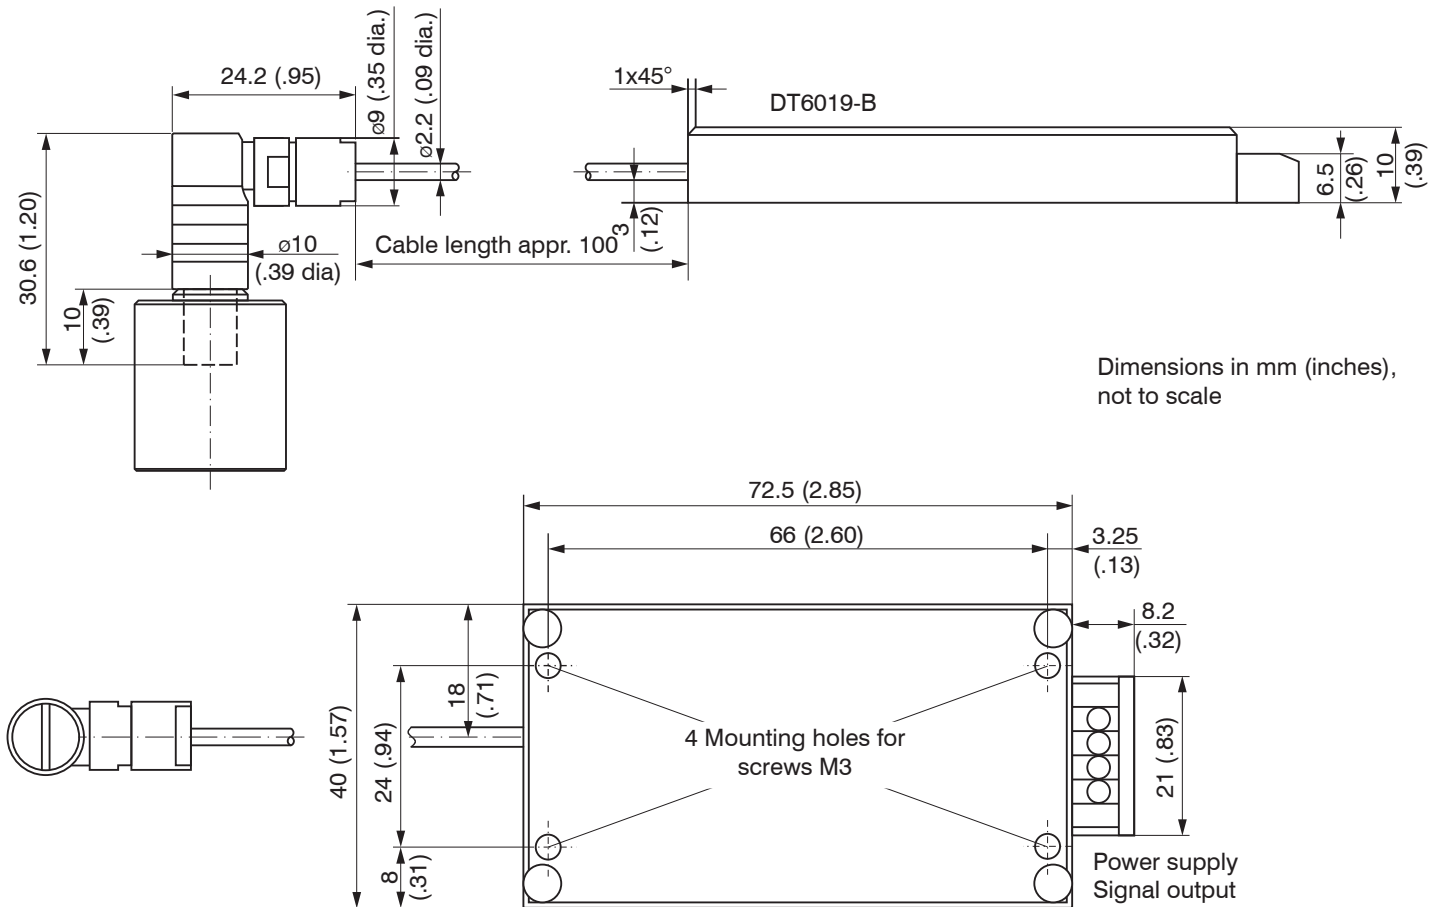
Dimensional drawing controller and sensor cable with angled connector for the sensors CS1, CS2, CS3, CS5 and CS10
